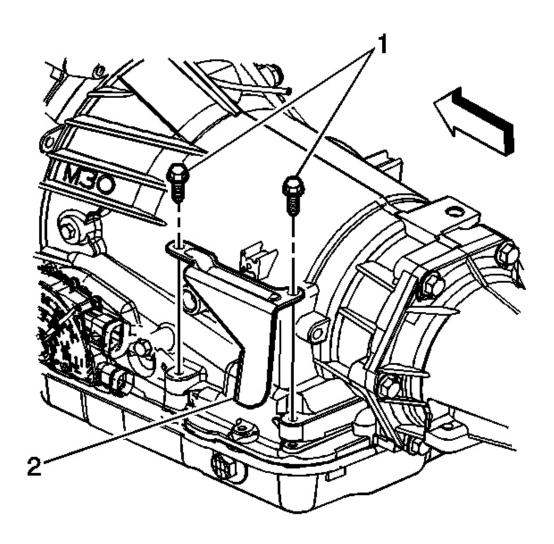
View Of Selector Cable Bracket & Bolts Courtesy of GENERAL MOTORS CORP.
